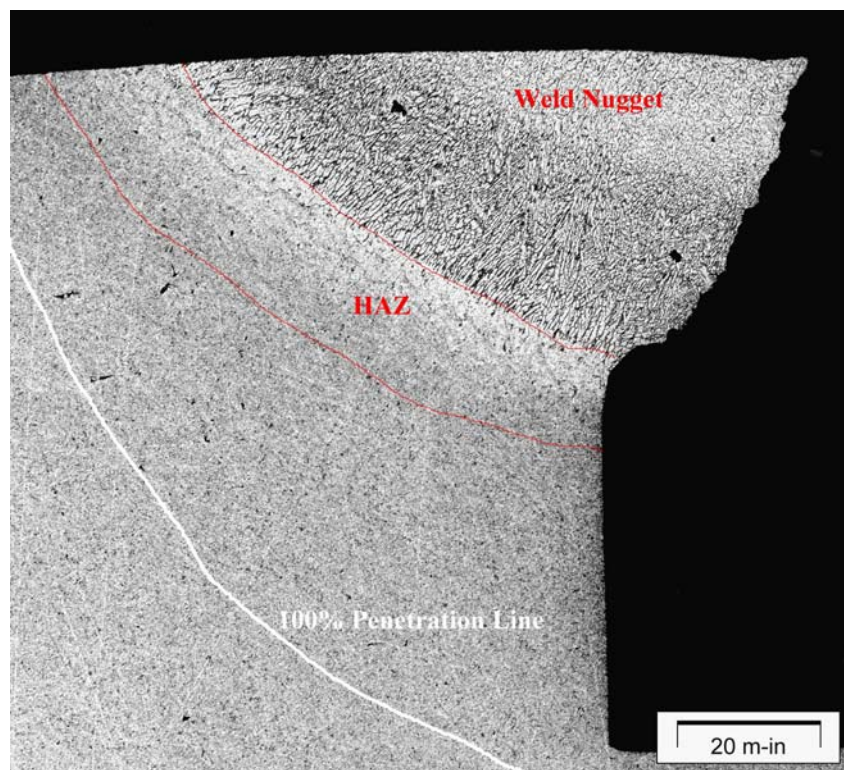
Elbow side cross section through the weld; the white line depicts what would be a 100% penetration weld.
